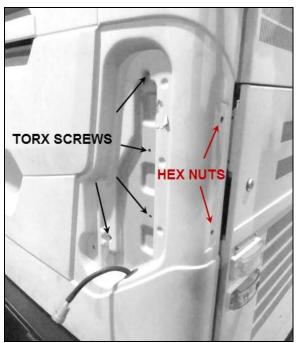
TAILLAMP POD RETAINING SCREWS & NUTS
